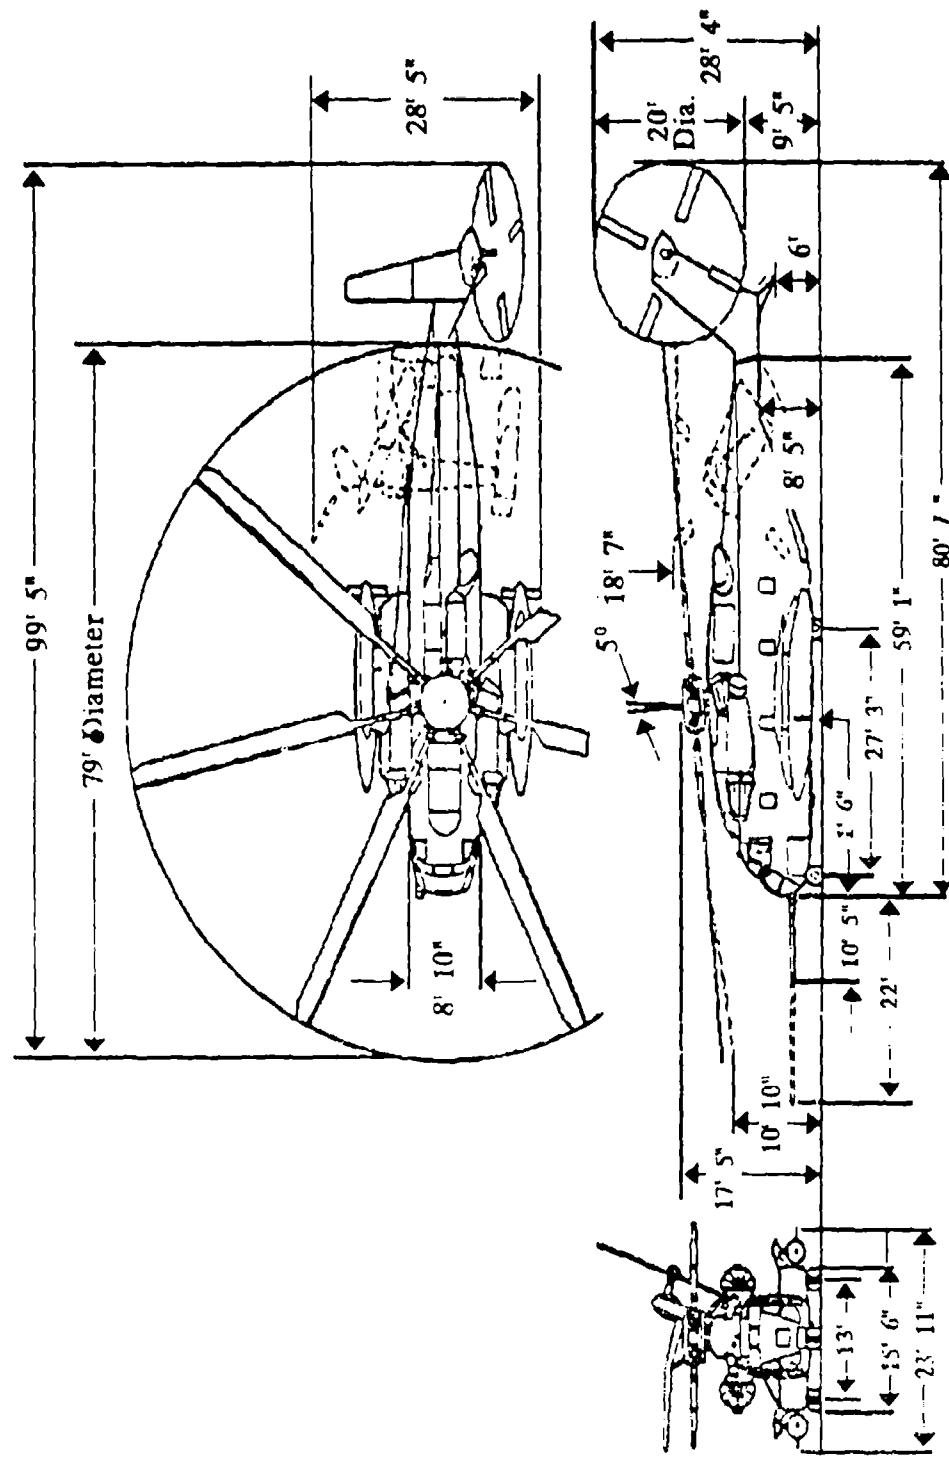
THREE-VIEW DRAWING OF THE SIKORSKY CH-53E
